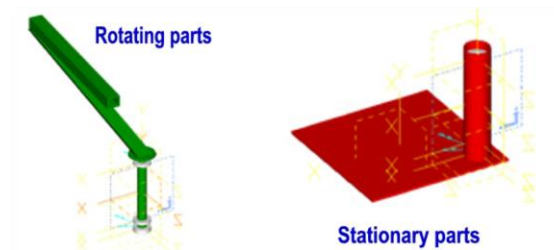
Rotating and Stationary Parts of Lift Assembly.
